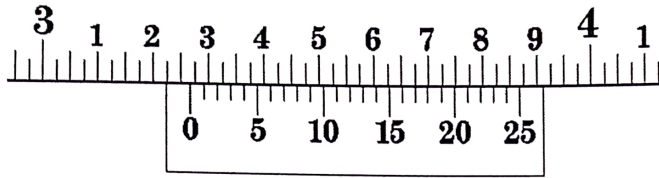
Vernier Calliper Reading(mm). Fig. 3.2: Micrometre Screw Gauge Reading(mm).
